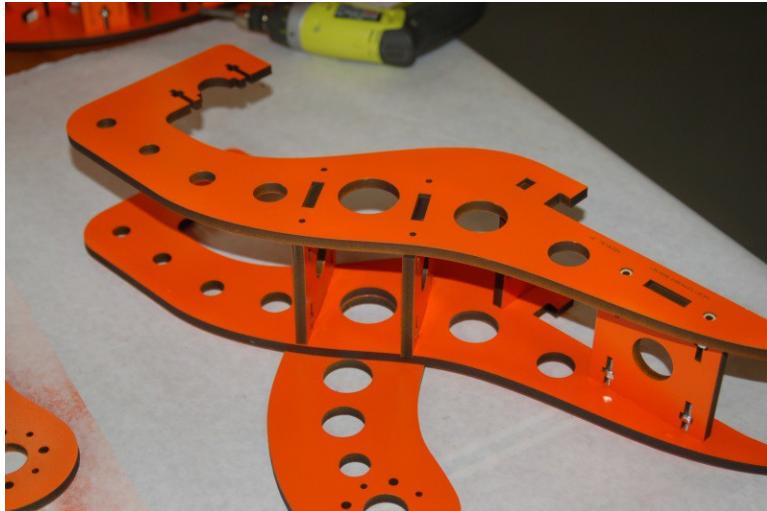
Completing assembly. (Spool holder omitted for clarity)
